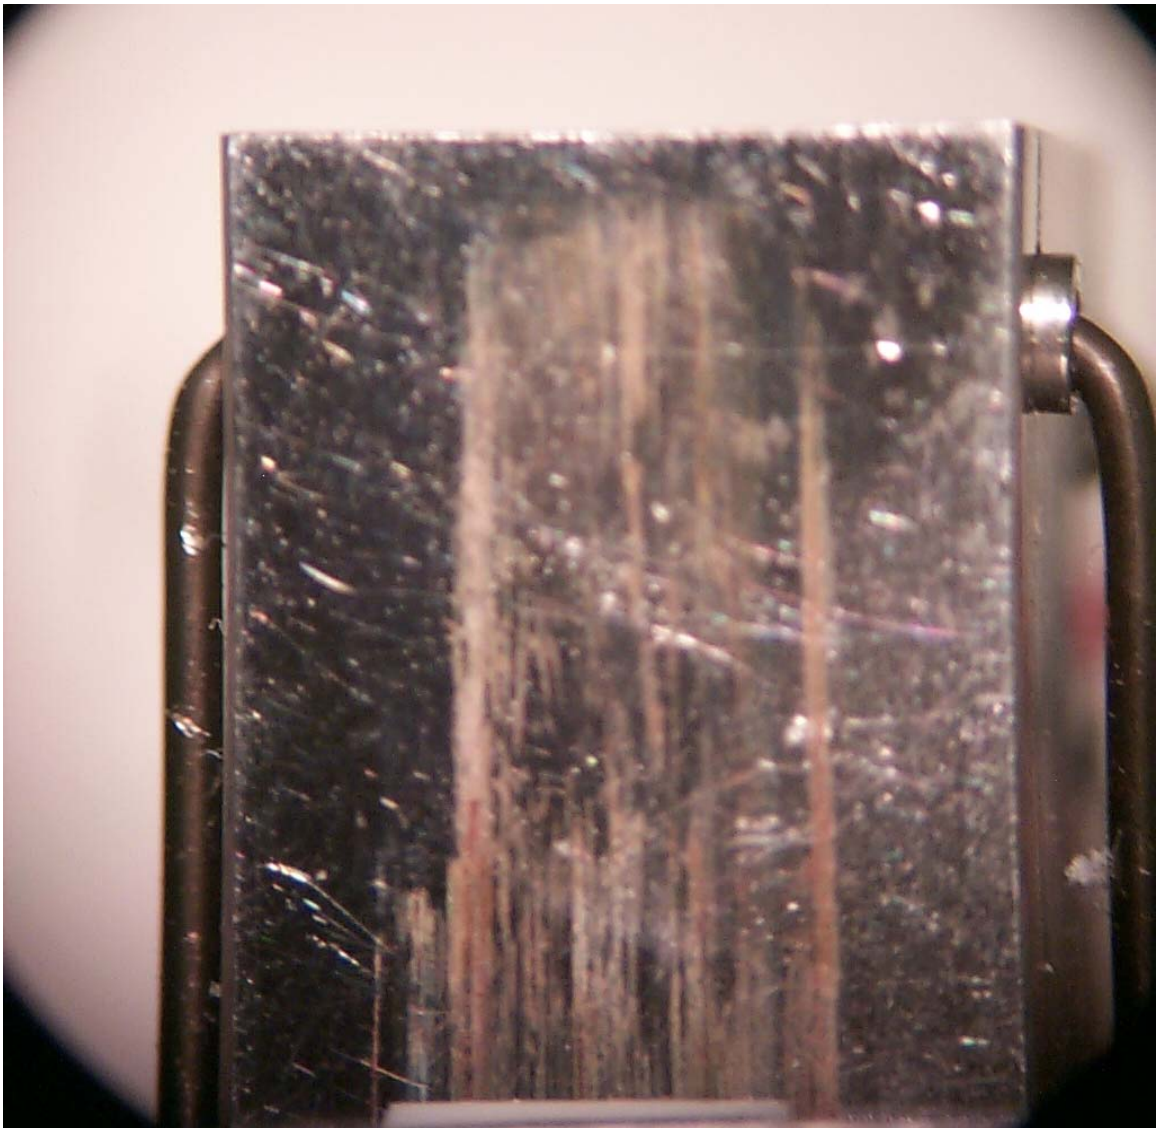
Motor prototype part surface farthest from actuators after 1.243 mile (2km) sliding endurance test (made of 52100 steel gage block)
